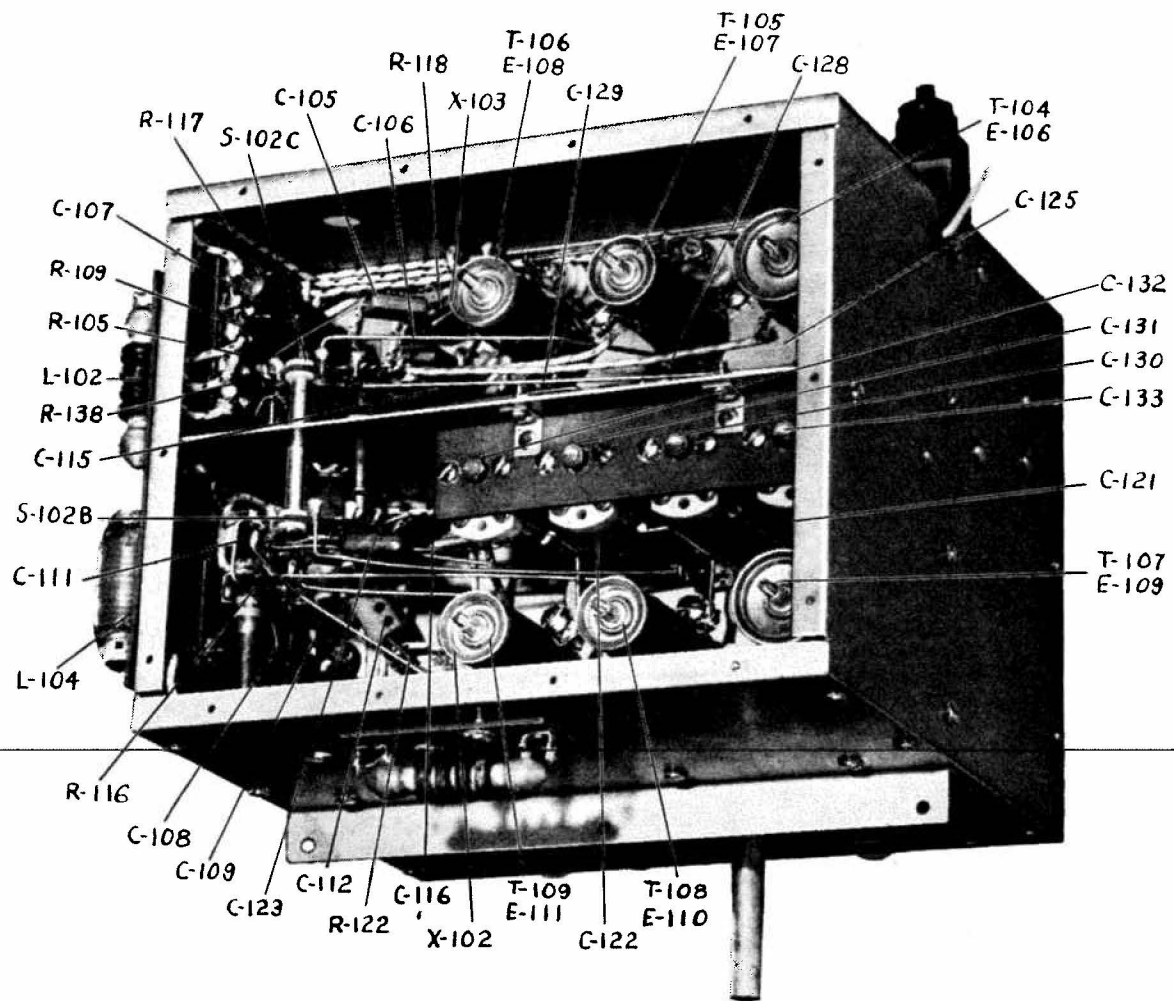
TOP OBLIQUE VIEW, R.F. AND H.F. OSC. COMPARTMENT, SHIELDS PARTIALLY REMOVED.
